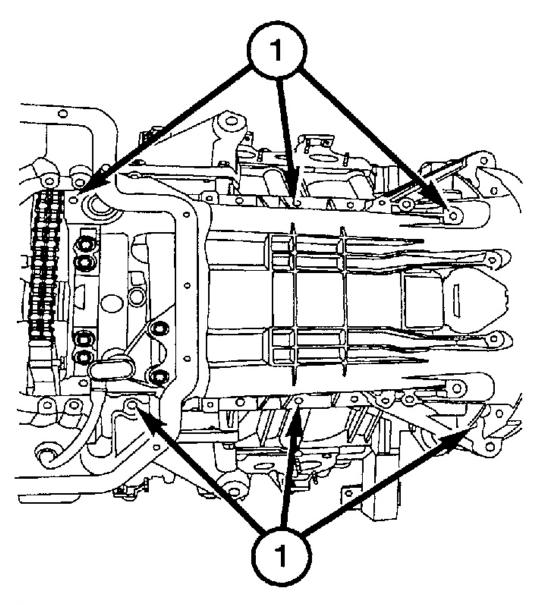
Removing Lower Oil Pan Retaining Bolts & Lower Oil Pan Courtesy of DAIMLERCHRYSLER CORP.
